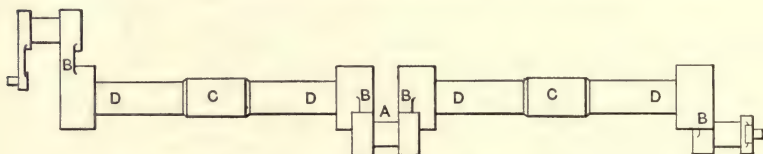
Three-crank Pin Shaft with Return Cranks.
